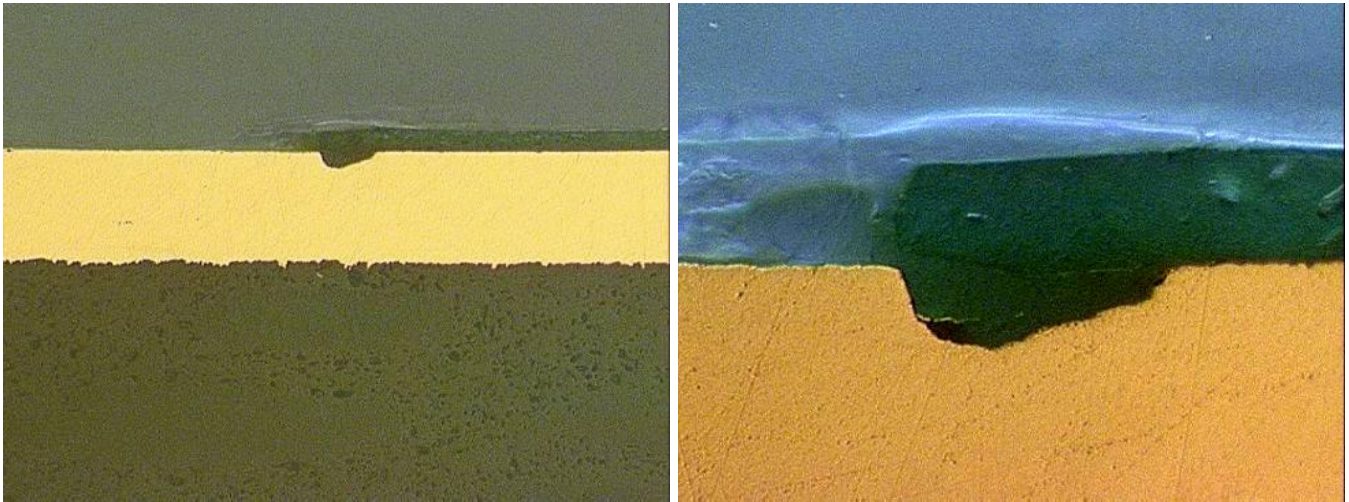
Cross-sectional Views of the Fabrication Defect in the Test Vehicle at the PDIP-20 Locations (Left – Macro View, Right – Magnified View)
